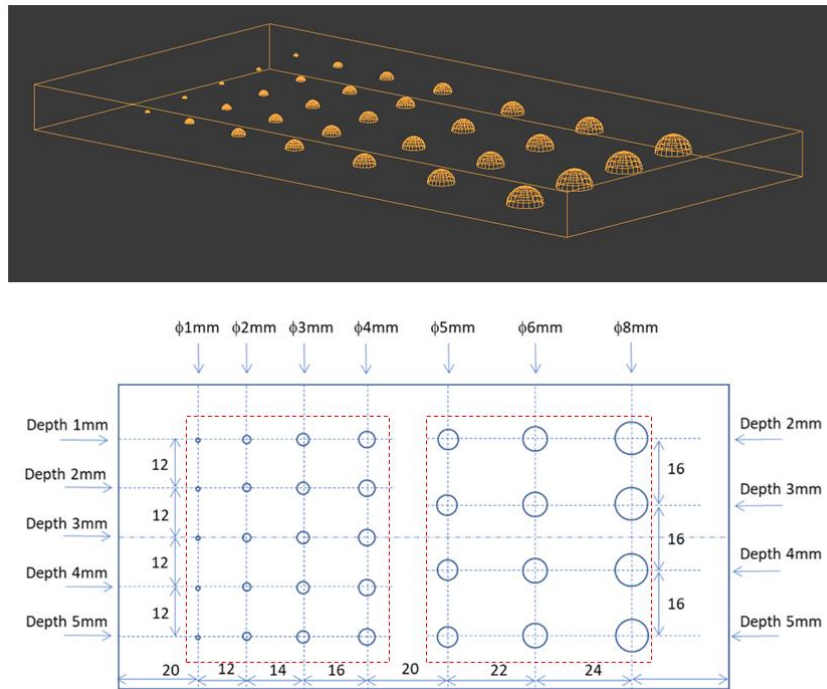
(Top) 3D rendering of hemispherical porosity defects imprinted in AM specimens. (Bottom) Design pattern of hemispherical defects of different diameters and depths relative to plate surface (all dimensions are in mm)
